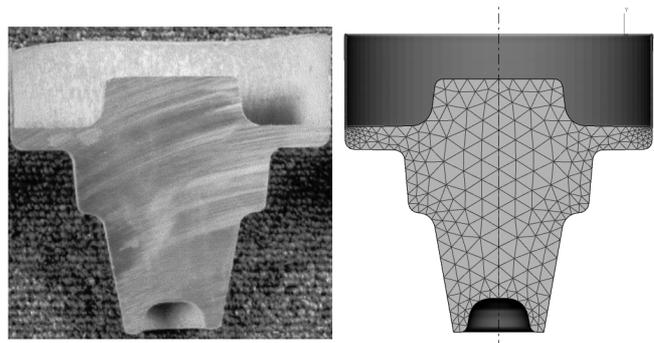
Forging part with flange: a – experiment; b – FEM.
